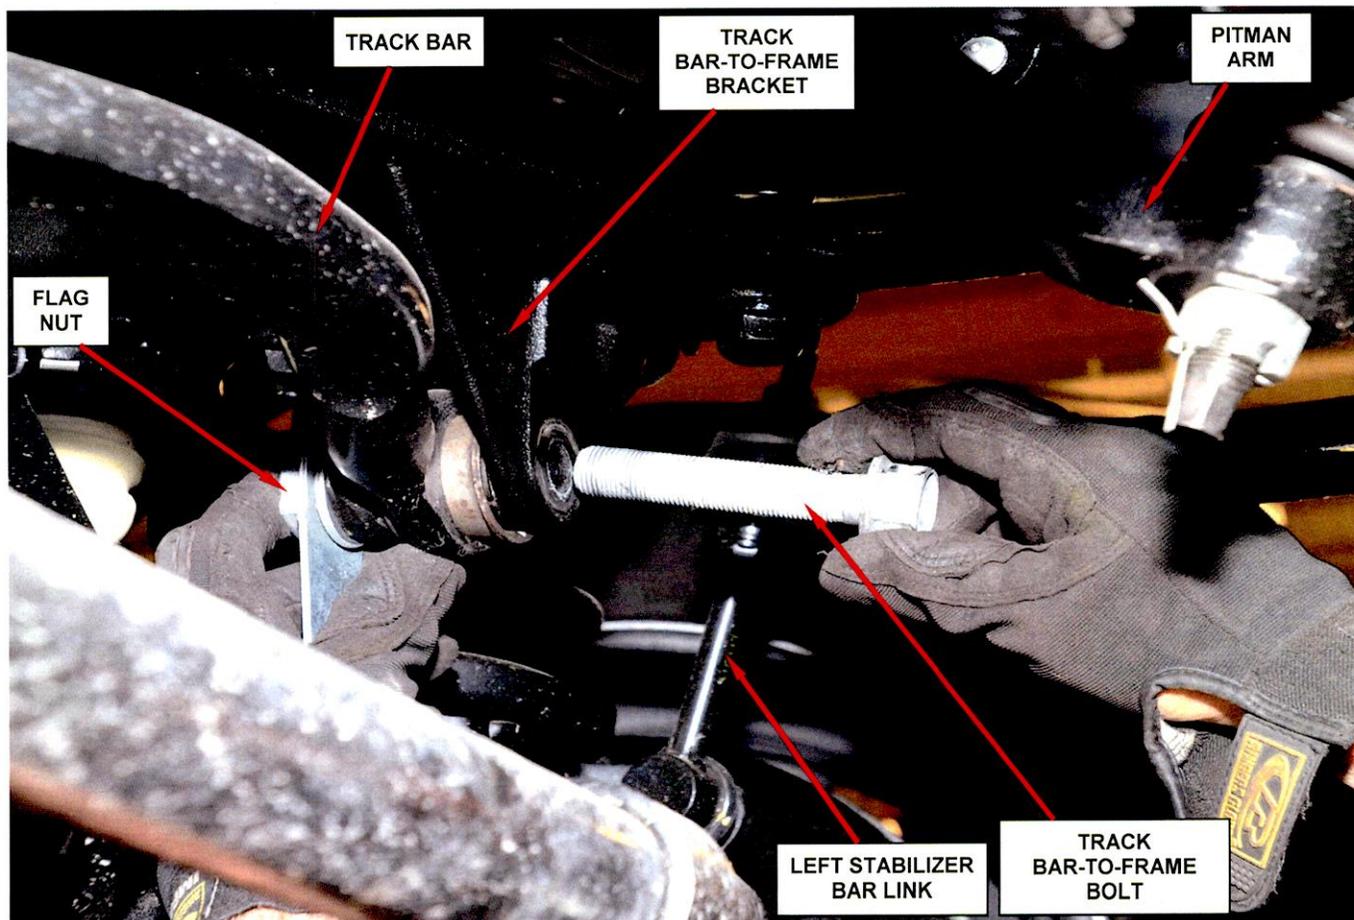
Remove/Install Track Bar-to-Frame Bolt
